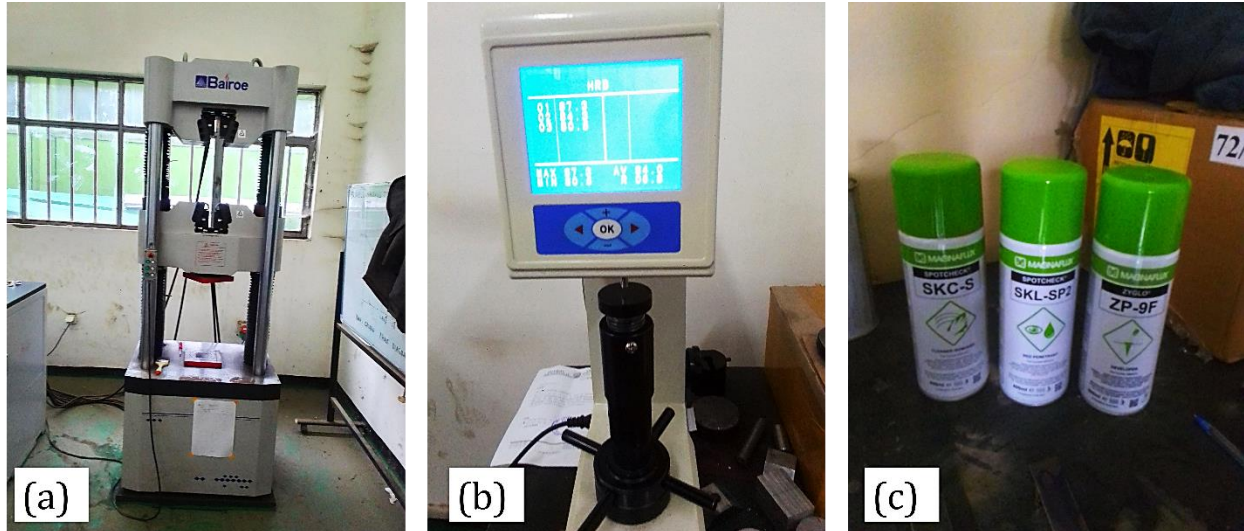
2 Equipment used in quality control for MIG welding
